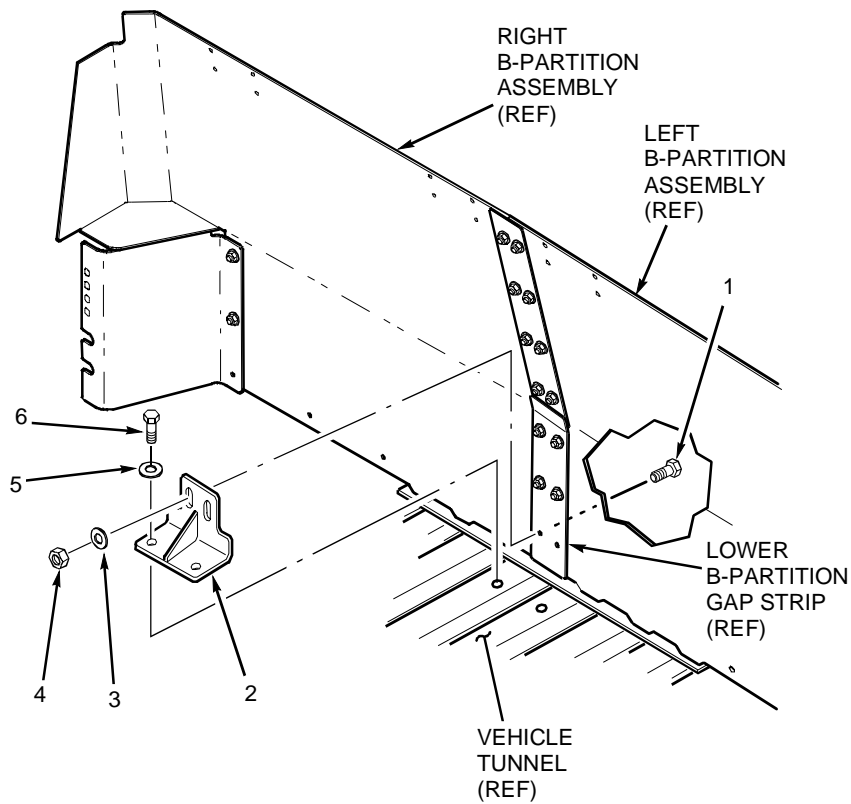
B-Partition Center Mount Removal (2 Door Only)
